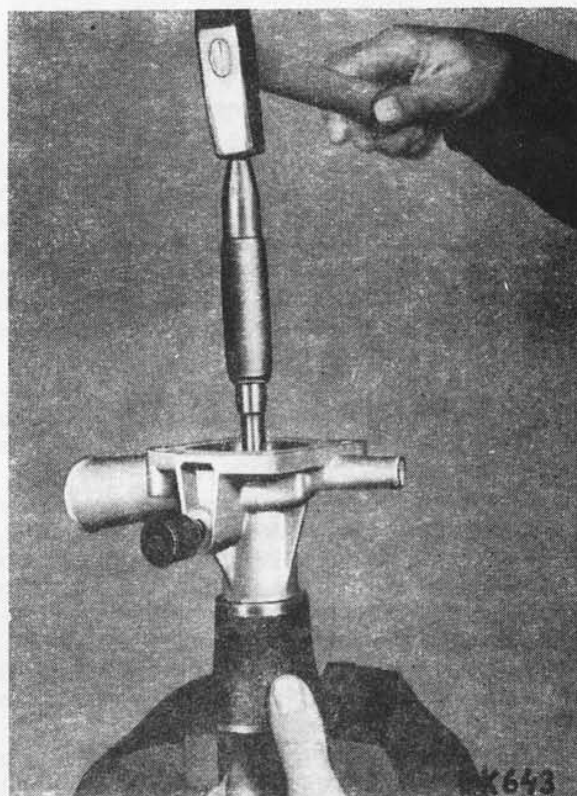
/3 - Driving Out Pump Bearings Using MP 1-122 Drift
